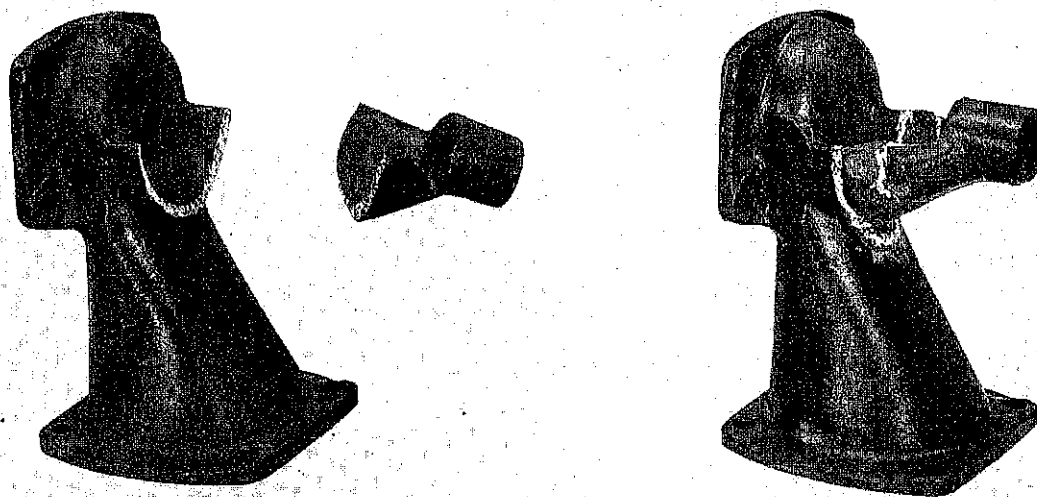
BROKEN WATER PUMP CASTING OF A TRACTOR.
